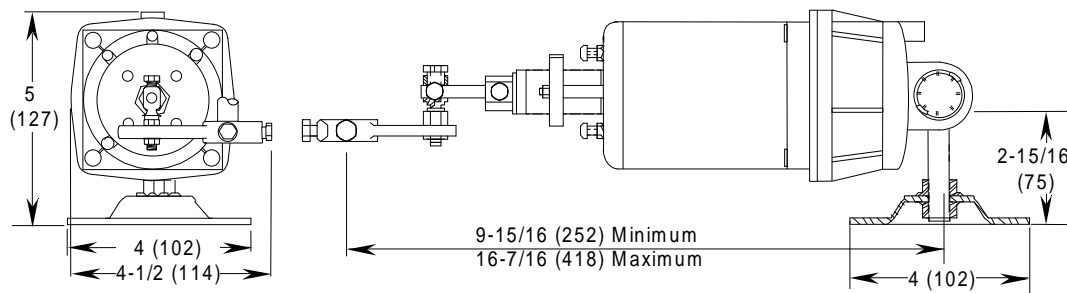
D-4070 with Auxiliary Mounting Bracket, inches (mm)
